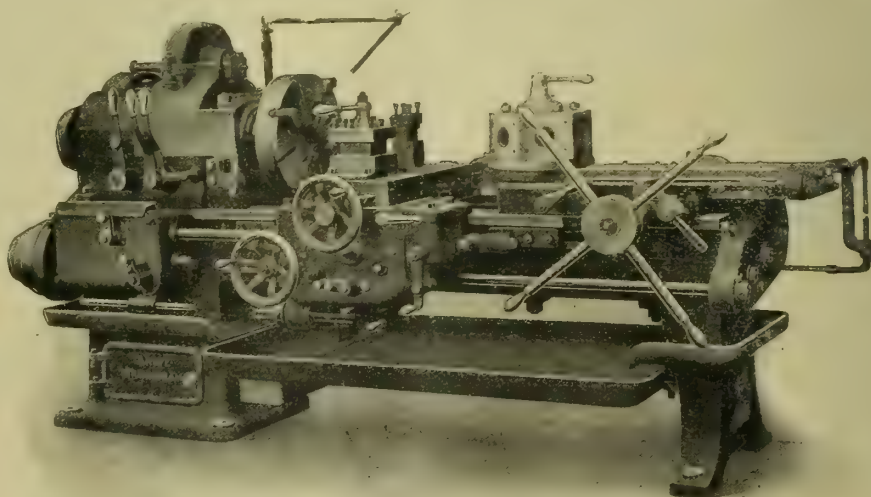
10 IN. CAPSTAN AND TURRET LATHE. MESSRS. TANGYES, LTD., BIRMINGHAM.
